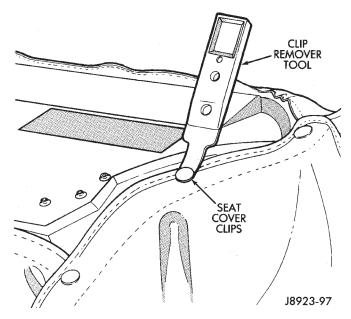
Seat Cushion Cover Retaining Clip Removal REAR SEATBACK LATCH STRIKER AND
